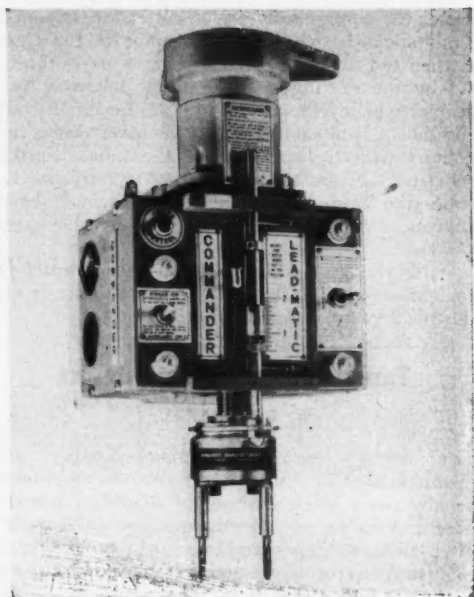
Providing for pitch-controlled tapping in an automatic single cycle, the Commander Leadmatic attachment is here shown fitted with a No. 200, 2-spindle head
